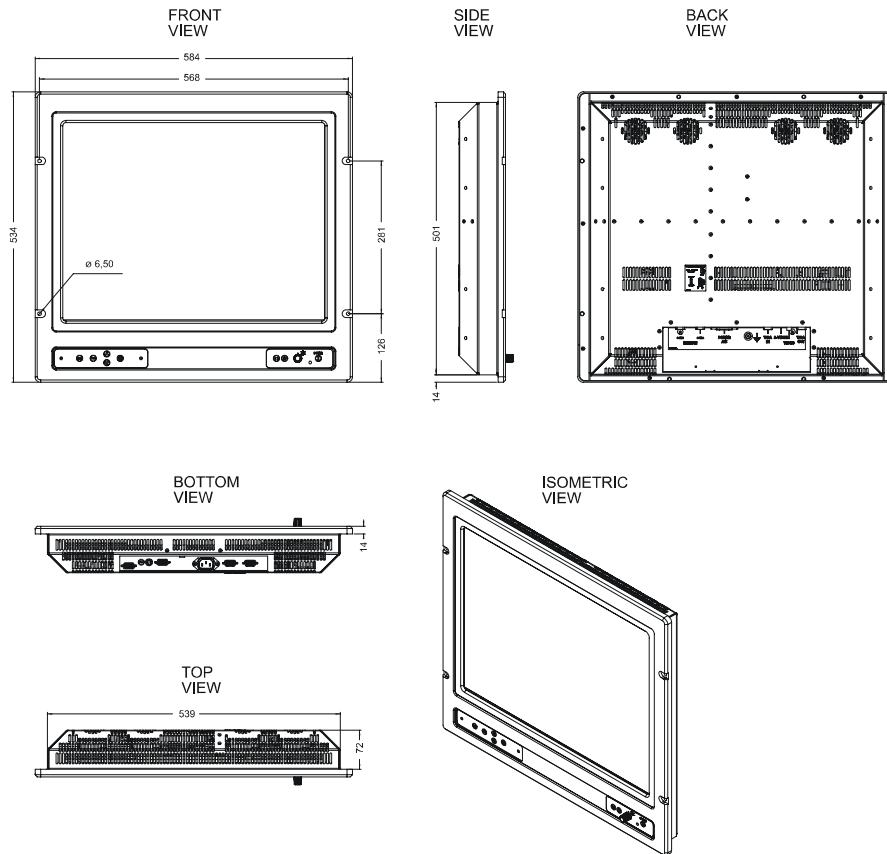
23" TFT Hatteland JH 23 T02 MMD. Standard View
